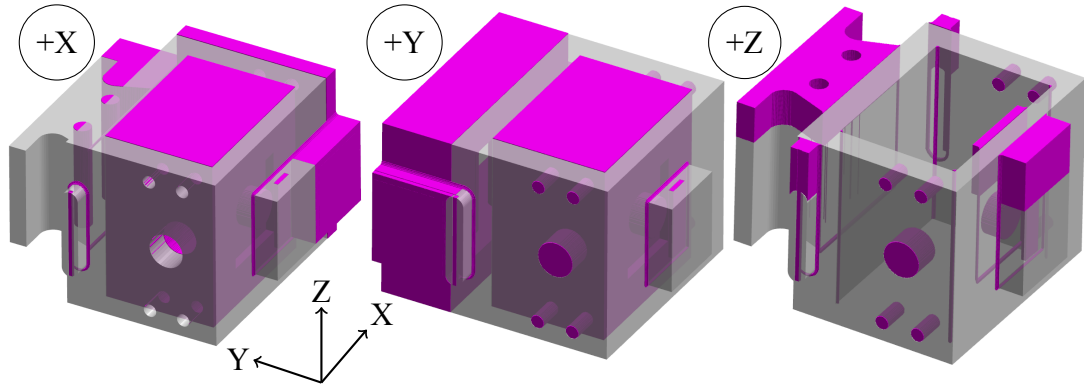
Maximum machinable solids for test part A using machine setups in positive X, positive Y, and positive Z.
